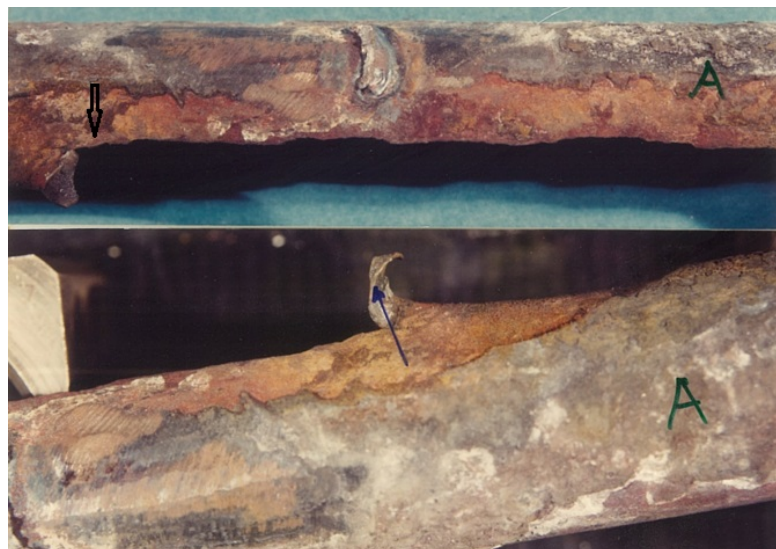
Corrosion seen on external surfaces (arrowed examples) of failed zone.
